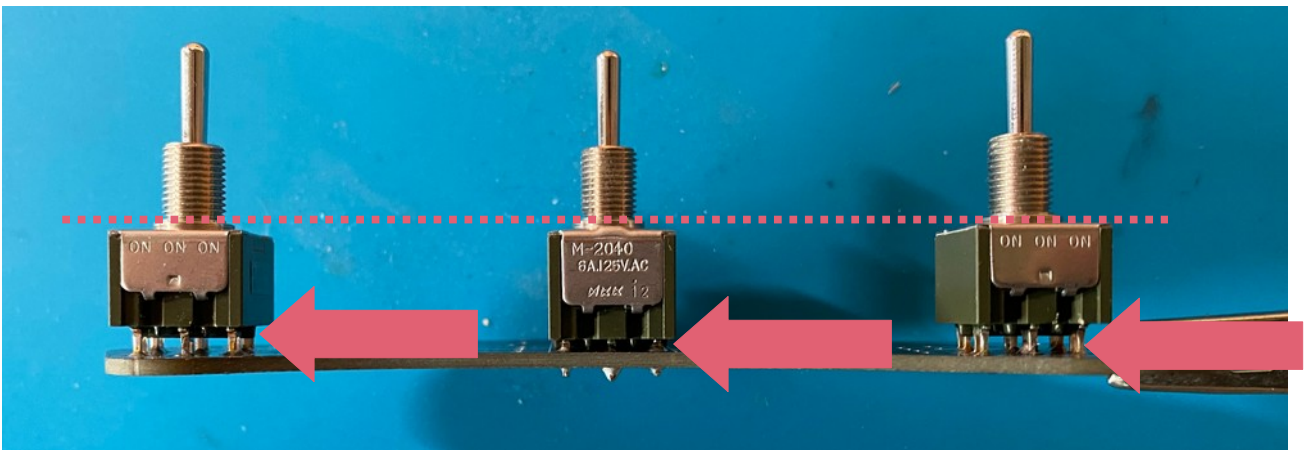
solder middle switch flush to the PCB, without any additional distance. Make sure the switches point up straight. Ideally the top surfaces of the switches align
